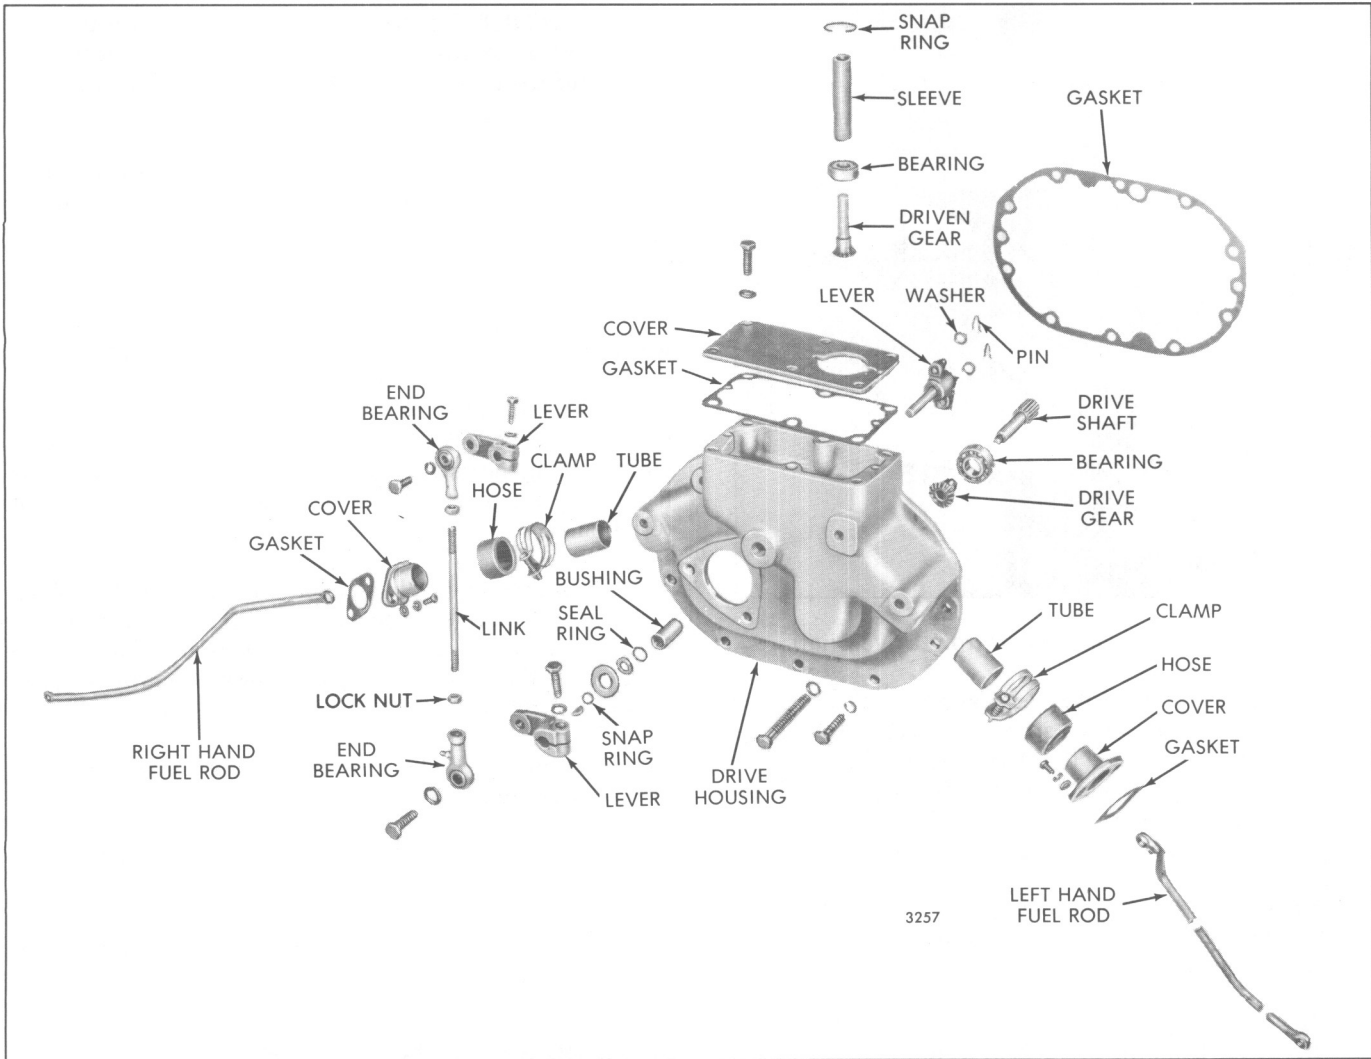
Details of Hydraulic Governor Drive and Relative Location of Parts
